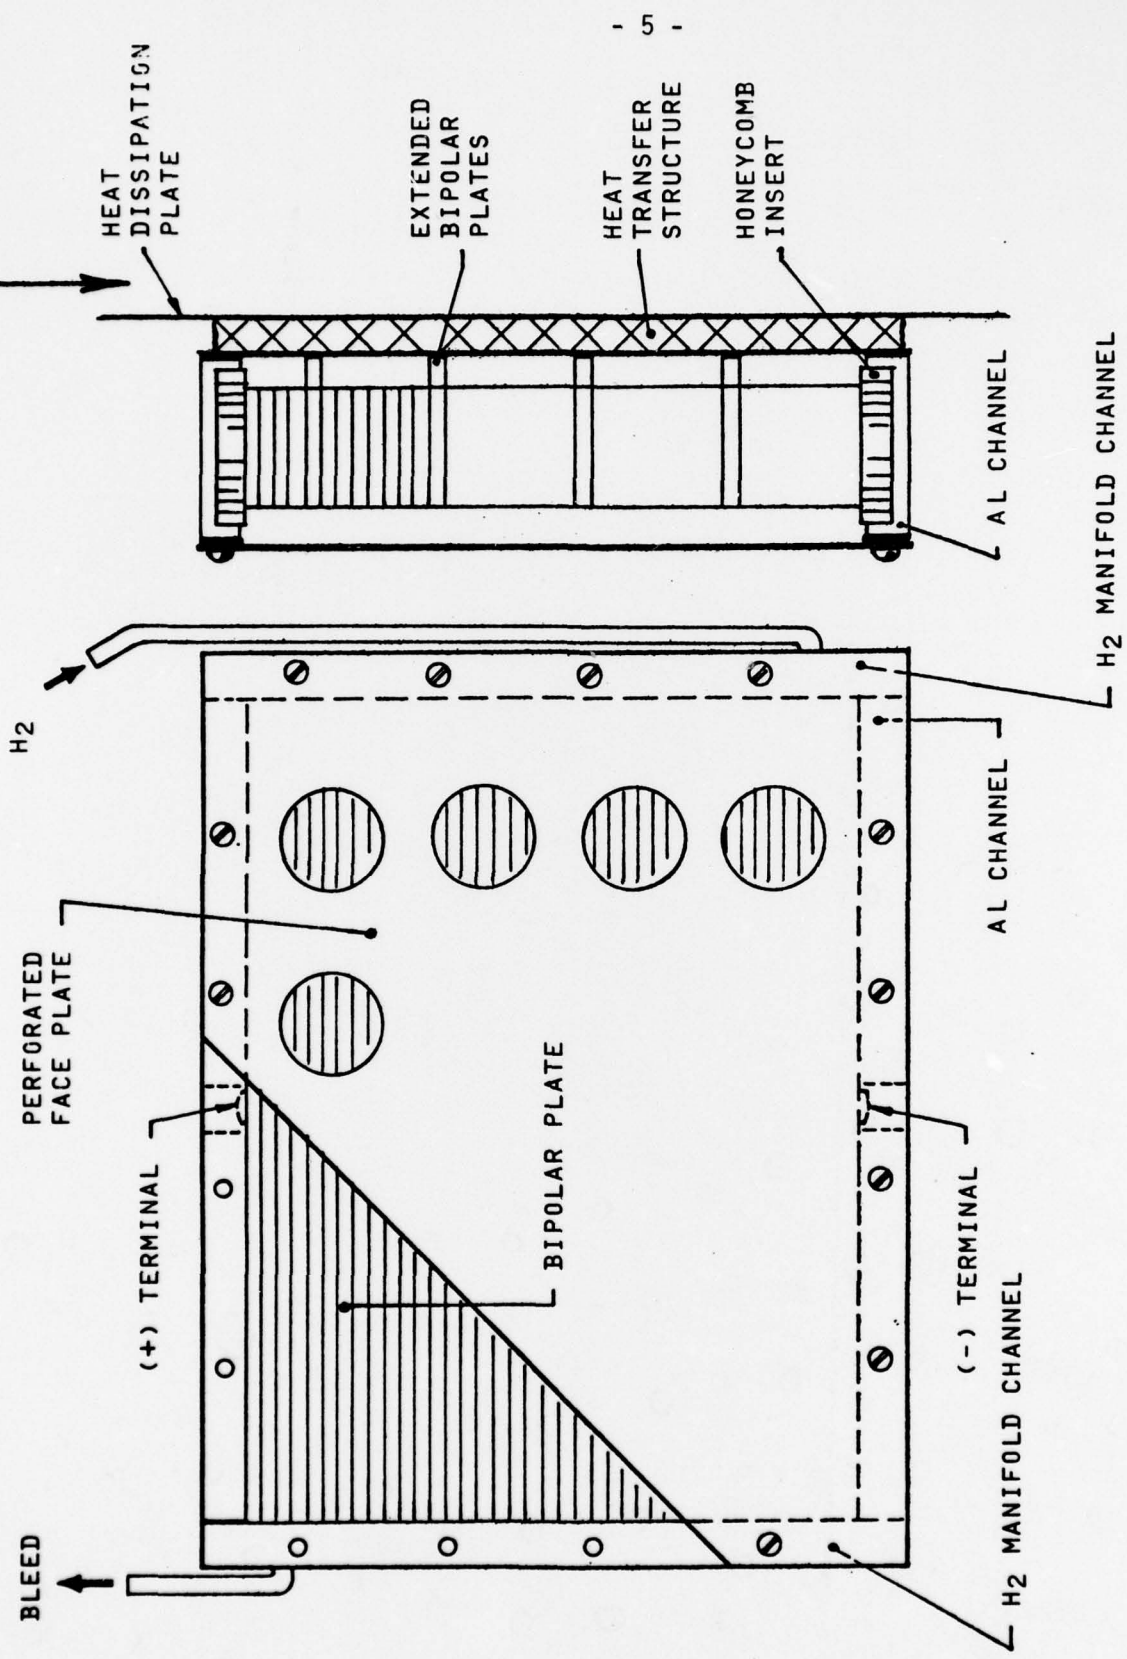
FUEL CELL STACK, FRONT & SIDE VIEW
